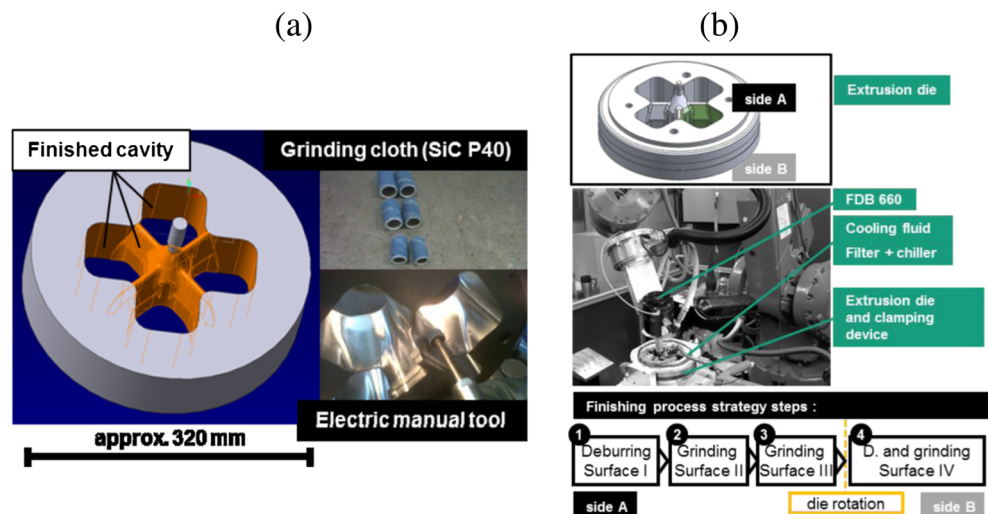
Robotic deburring-based vision sensors (Adapted from [124])
